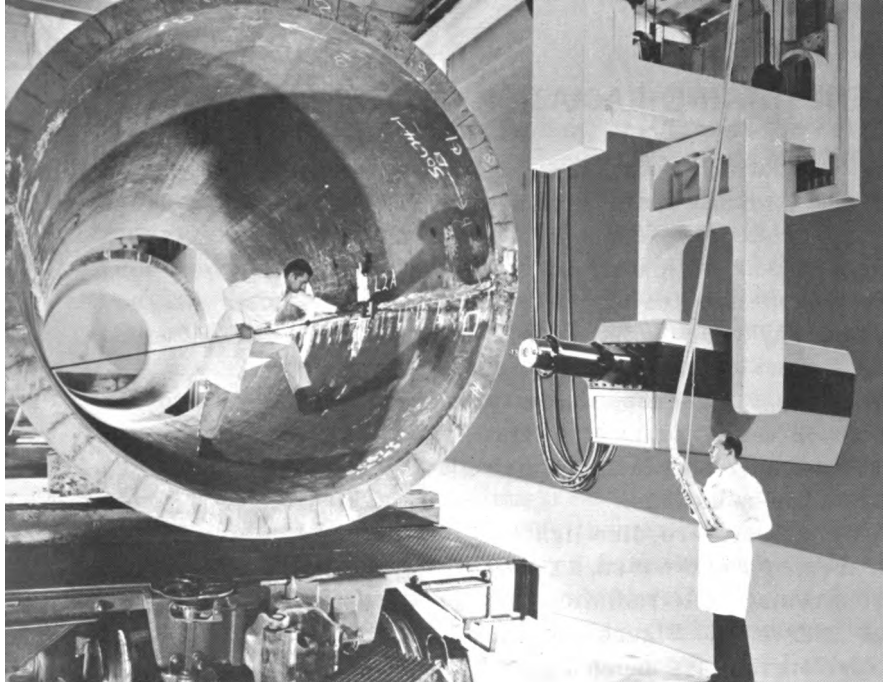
An 8,000,000-volt linear accelerator X-ray source being set up to radiograph a weld in a large steel pipe.
